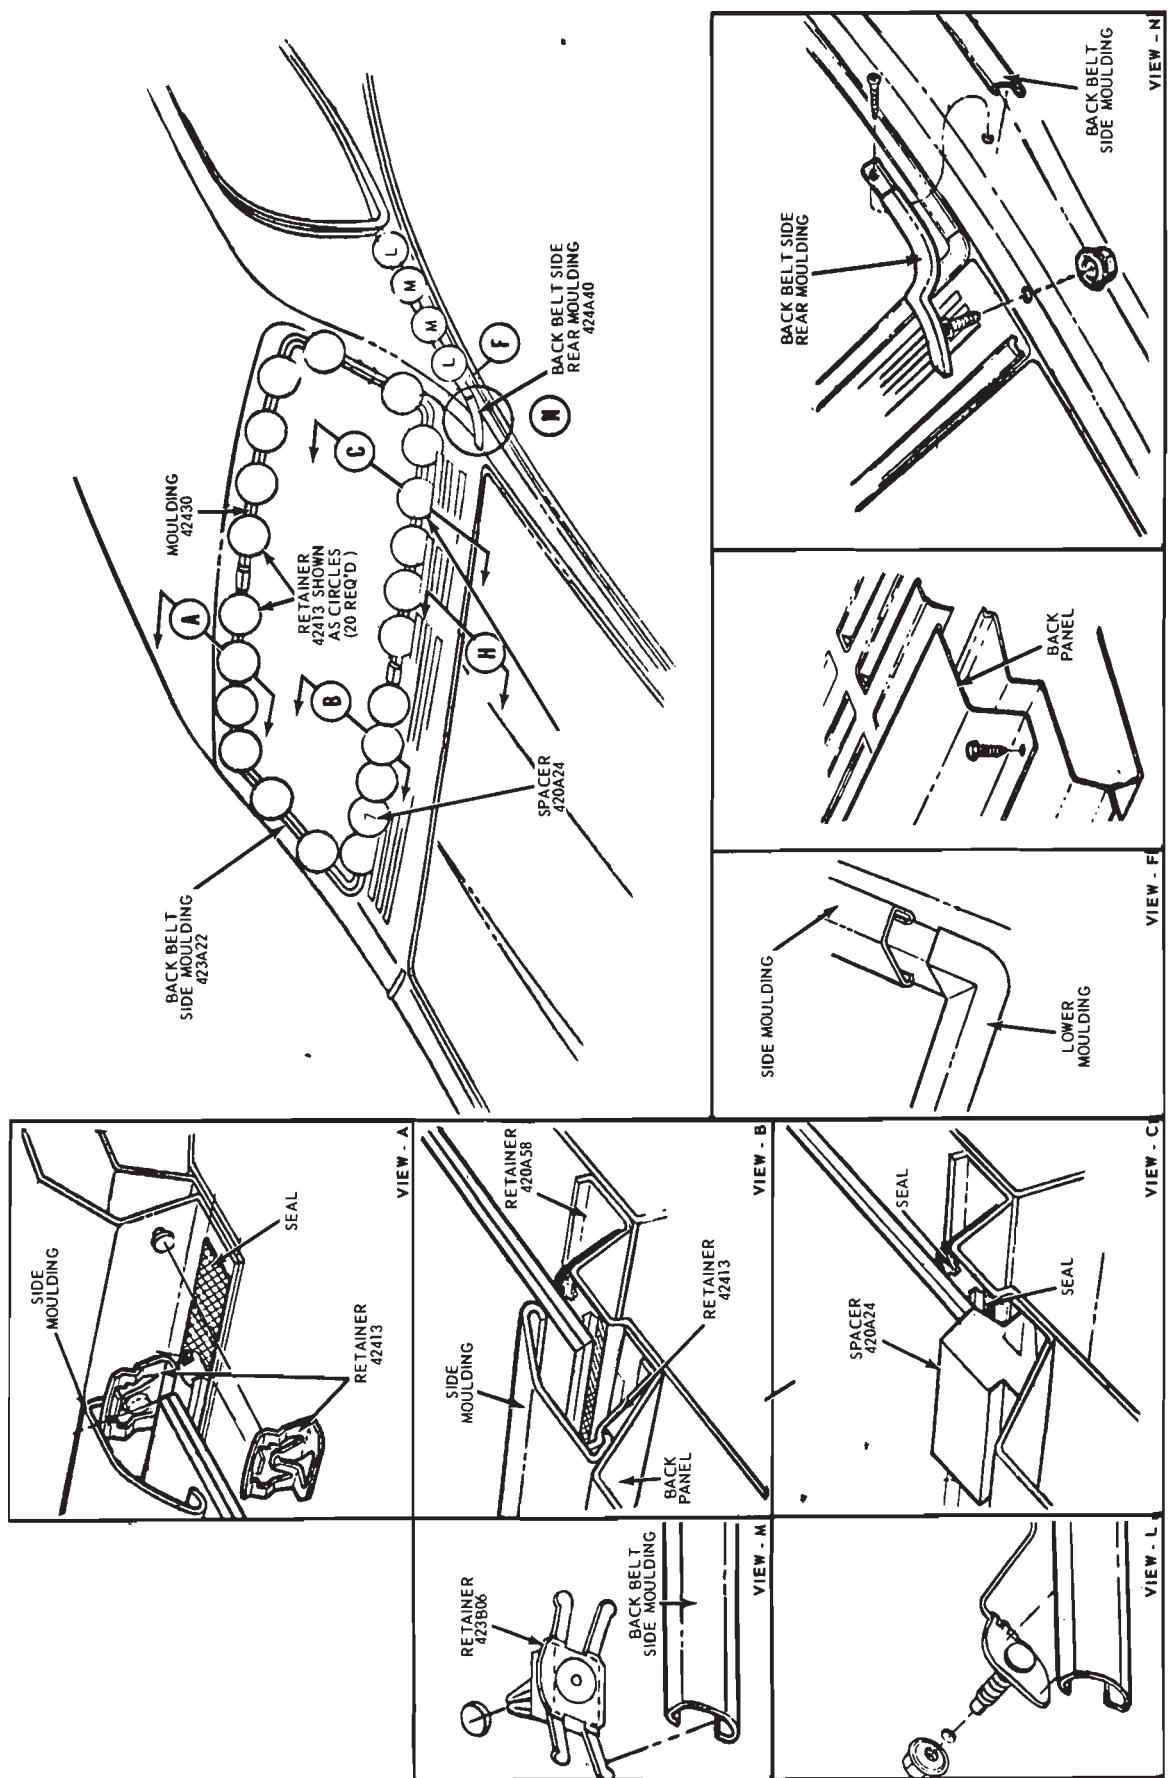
Back Window and Exterior Moulding Installation—Thunderbird Model 65
